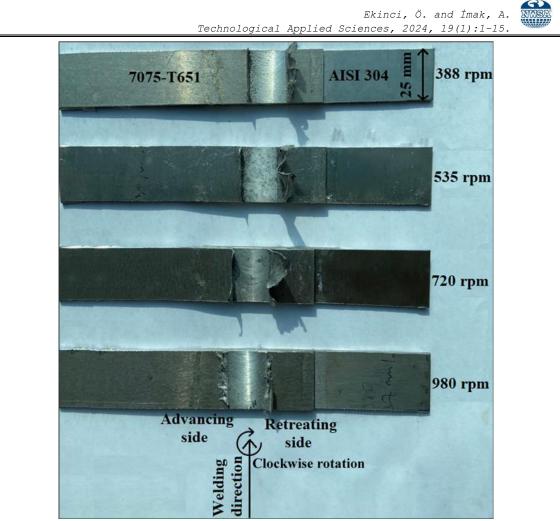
Tensile shear test samples manufactured from the cutting welded sheets
